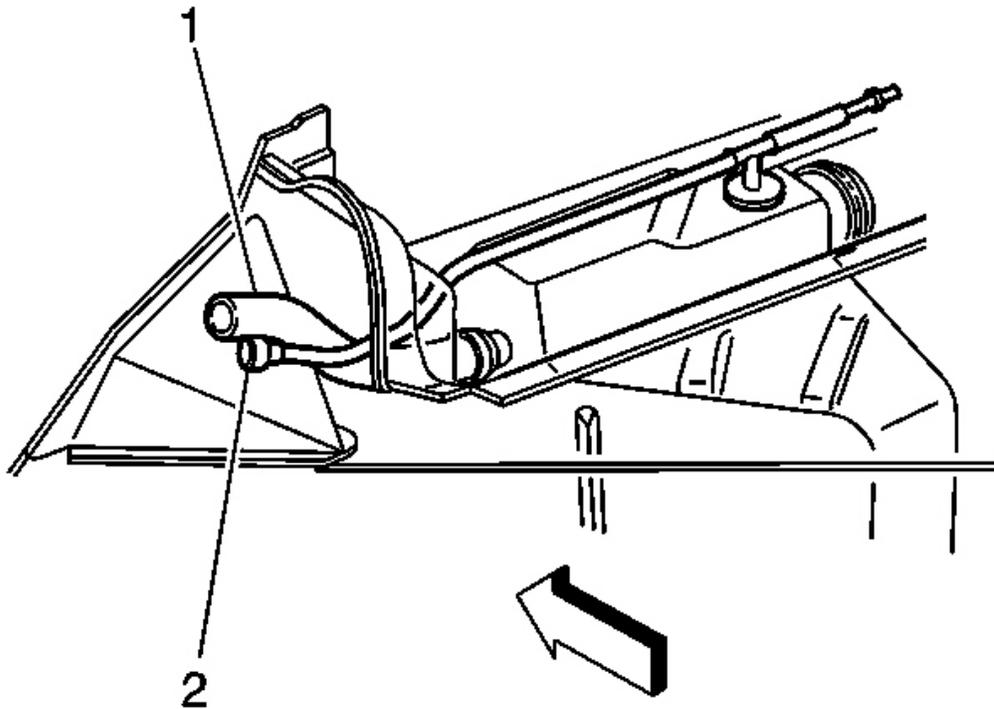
Fuel Tank Fill & Vent Pipe, Fuel Fill Hose & Vent Hose
